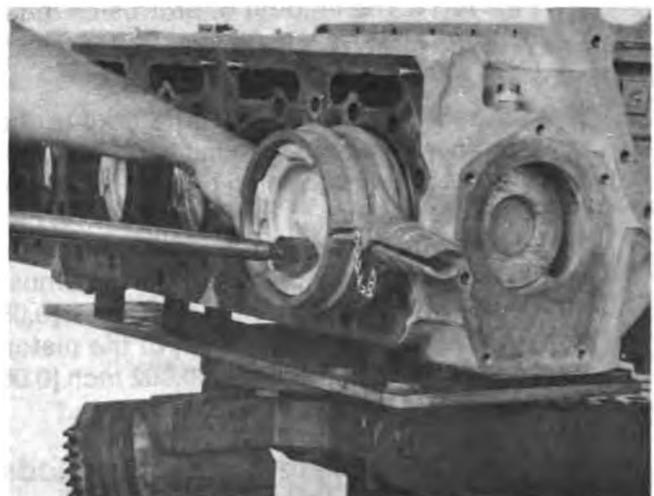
Install The Piston And Connecting Rod Assembly.
